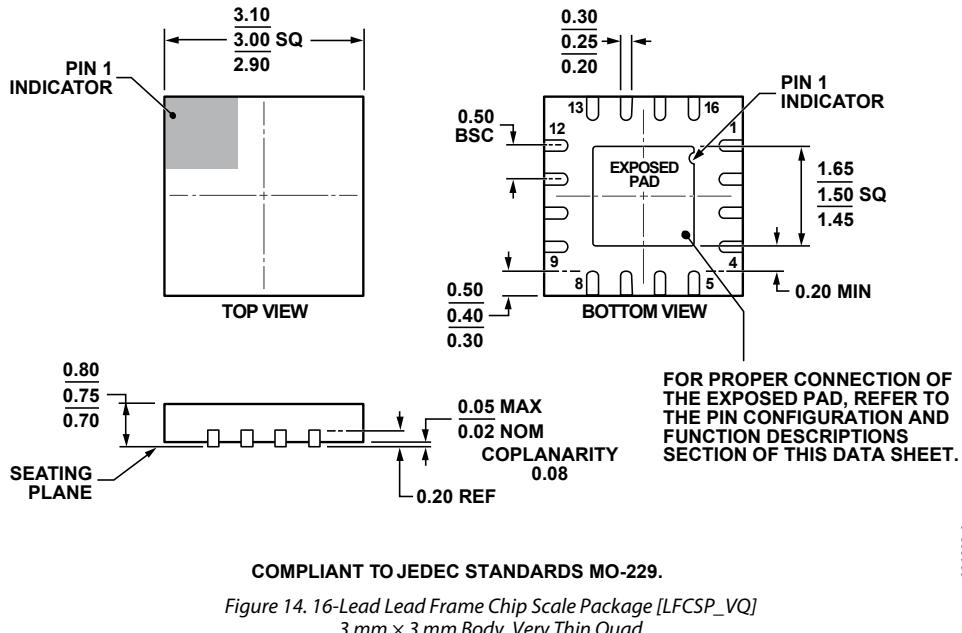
16-Lead Lead Frame Chip Scale Package [LFCSP_VQ]
